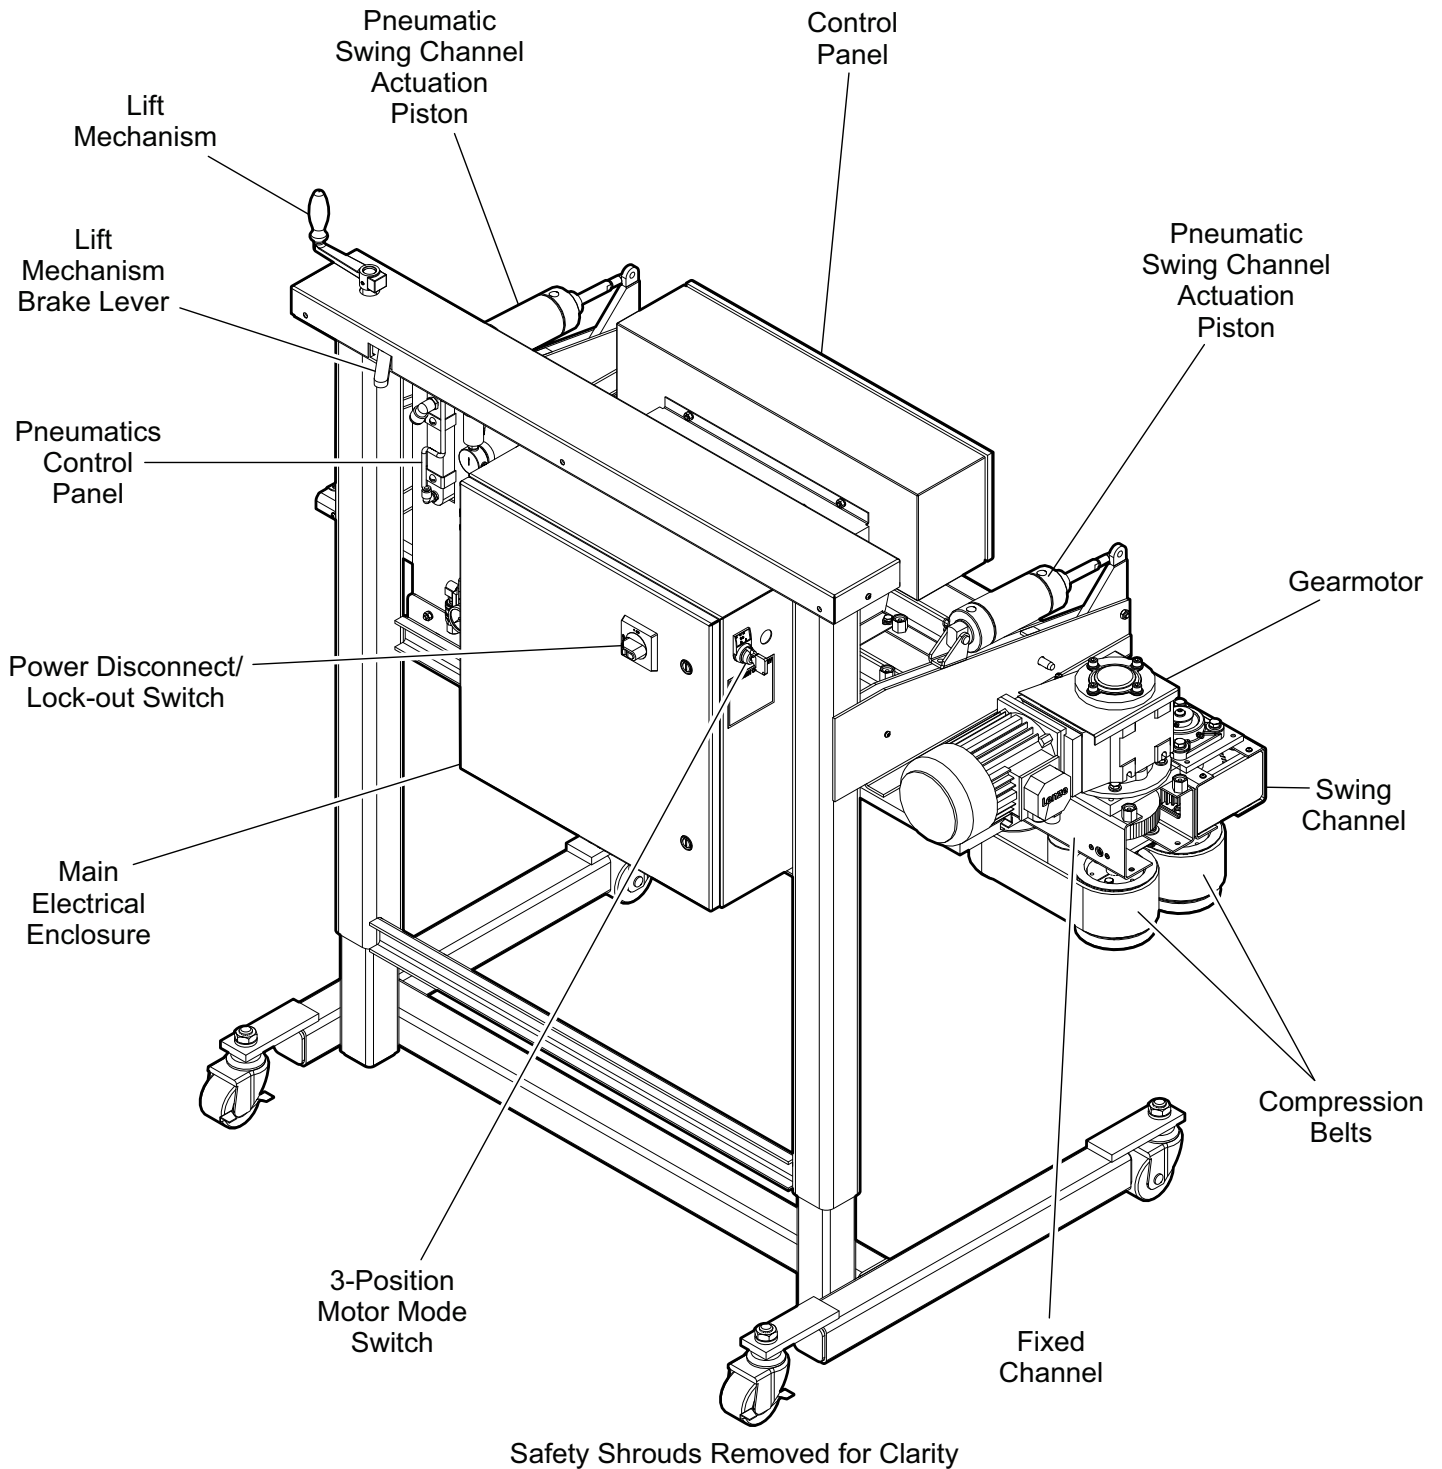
PBC6000 Right-to-Left Pinch Bag Closer Major Components - Rear View
